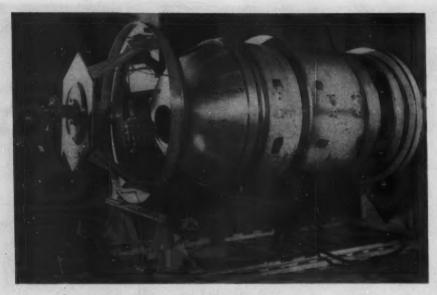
Tank for Discoverer missile set up for being welded so perfectly that helium gas cannot escape through seams.
